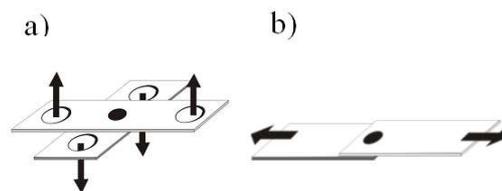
Scheme of: a) cross-tension tests, b) shear tension tests
